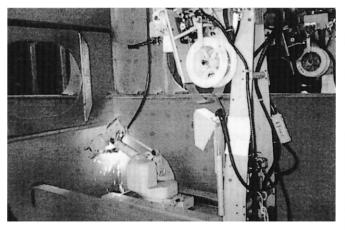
The application of DW-100V in robotic welding of cross joints of longitudinal and transverse components (wire dia: 1.4 mmØ)
